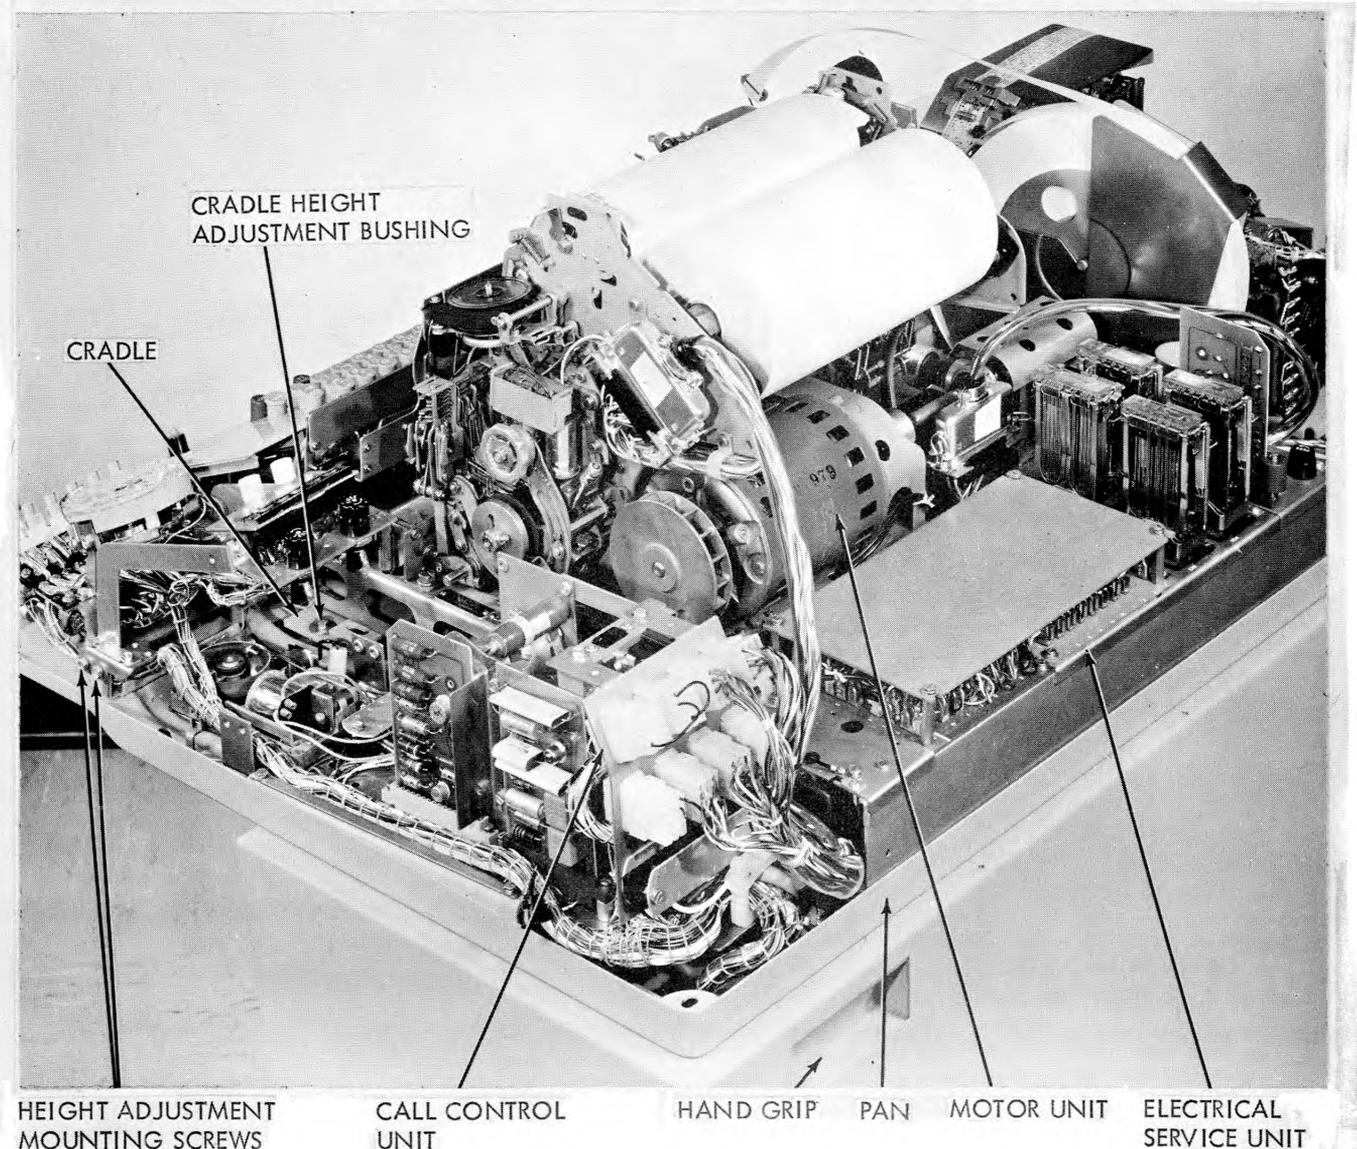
35 Cabinet - Cover Removed (Right Rear View)
